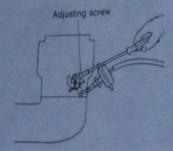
Adjusting the throttle positioner system (Sec. 3)
